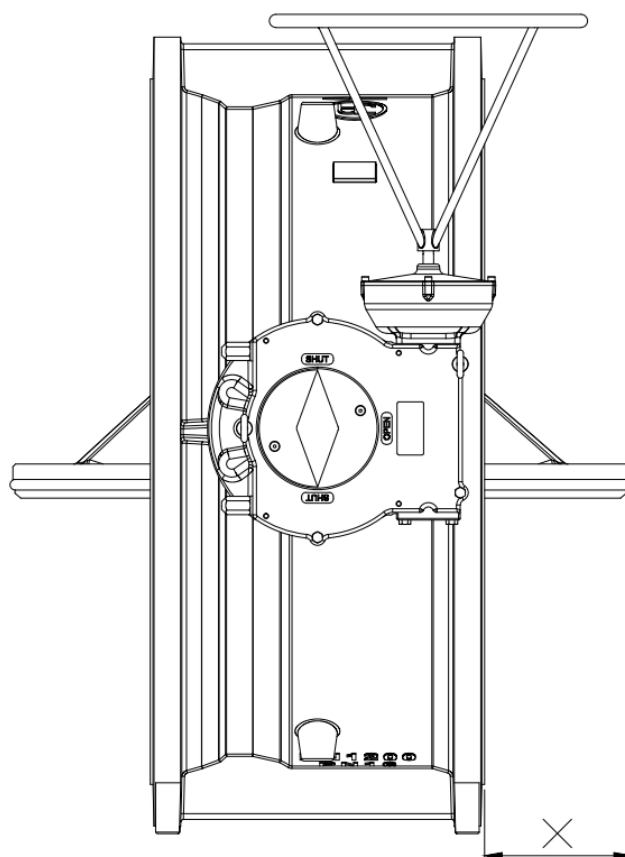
Preview drawing of a fully open valve 4493 DN1200 PN10
